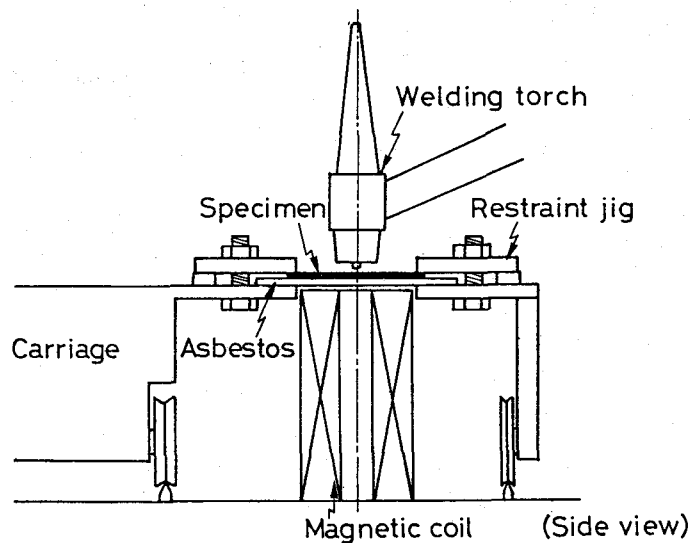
Arrangement of GTAW torch, magnetic coil and specimen for Houldcroft type cracking test.
